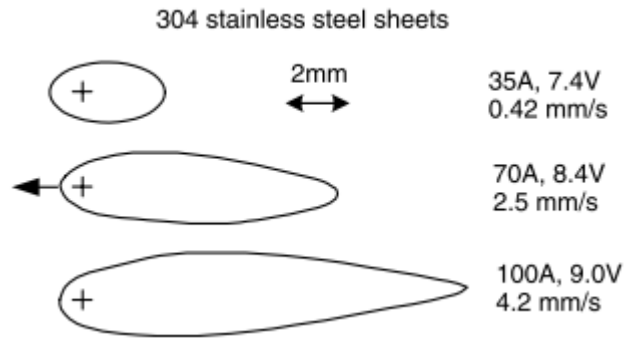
Effect of welding speed on pool shape in arc welding 304 stainless steel sheets.
